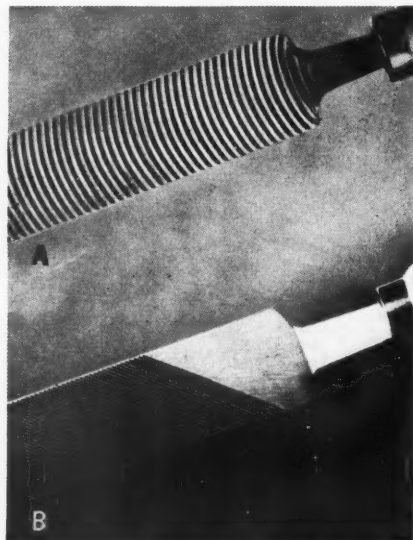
Illustration Showing Files Which are Designed for Filing Aluminum
